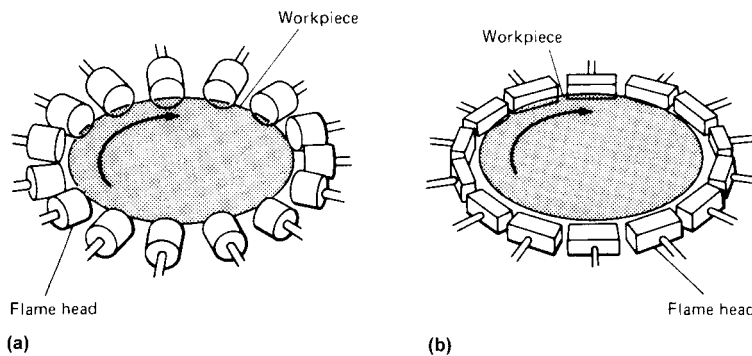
Setups for flame hardening gears, idler wheels, and sprockets. (a) Radiant burners. (b) High-velocity convection burners. Wide-face parts can be heated with double or staggered rings of burners.
